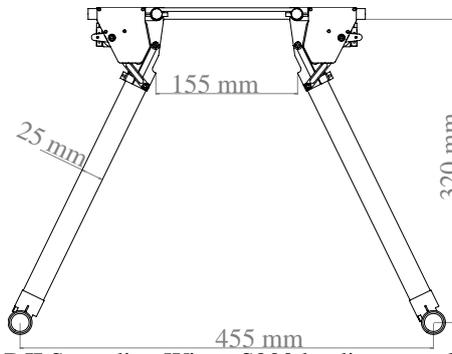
DJI Spreading Wings S900 landing gear dimensions.
